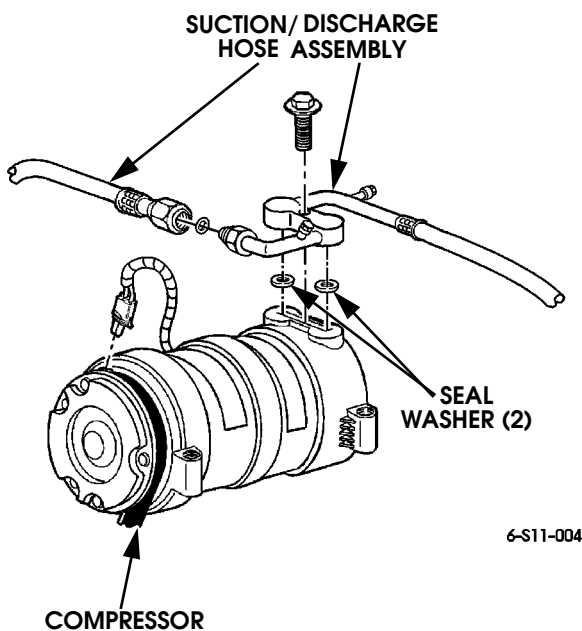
Suction/Discharge Hose Assembly Mounting
